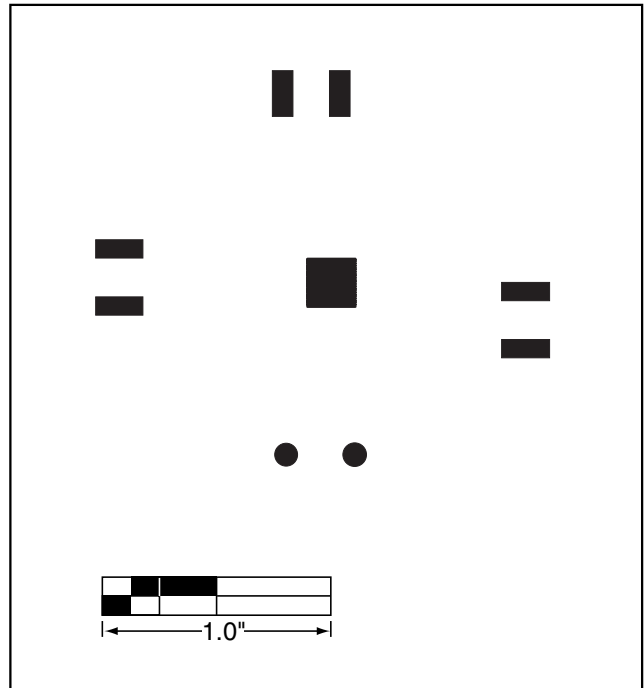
MAX9989/MAX9990 EV Kit PC Board Layout—Bottom Soldermask
